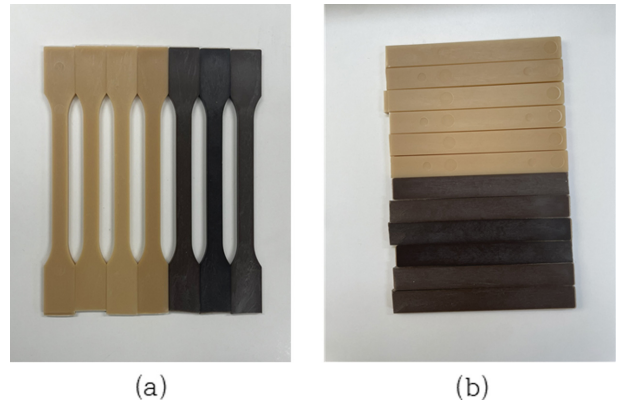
Injection-molded specimens for (a) tensile testing (ISO 527) and (b) flexural and impact testing (ISO 180).
